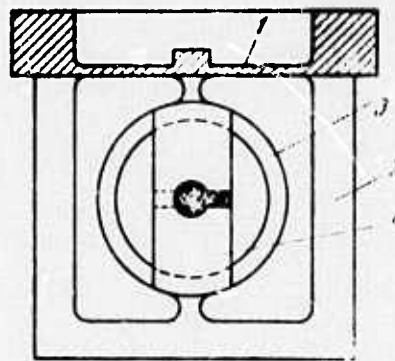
Segmented sensor. 1, 2 - steel flange and base; 3 - elastic element; 4 - piezo element support.
